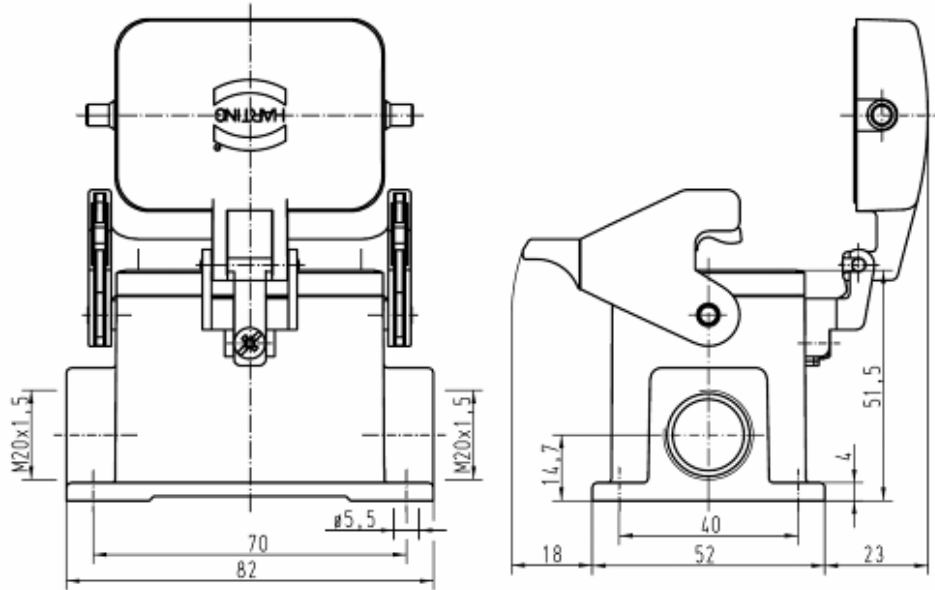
Surface mounting housing drawing (ref. Harting part nr. 19300062295)
